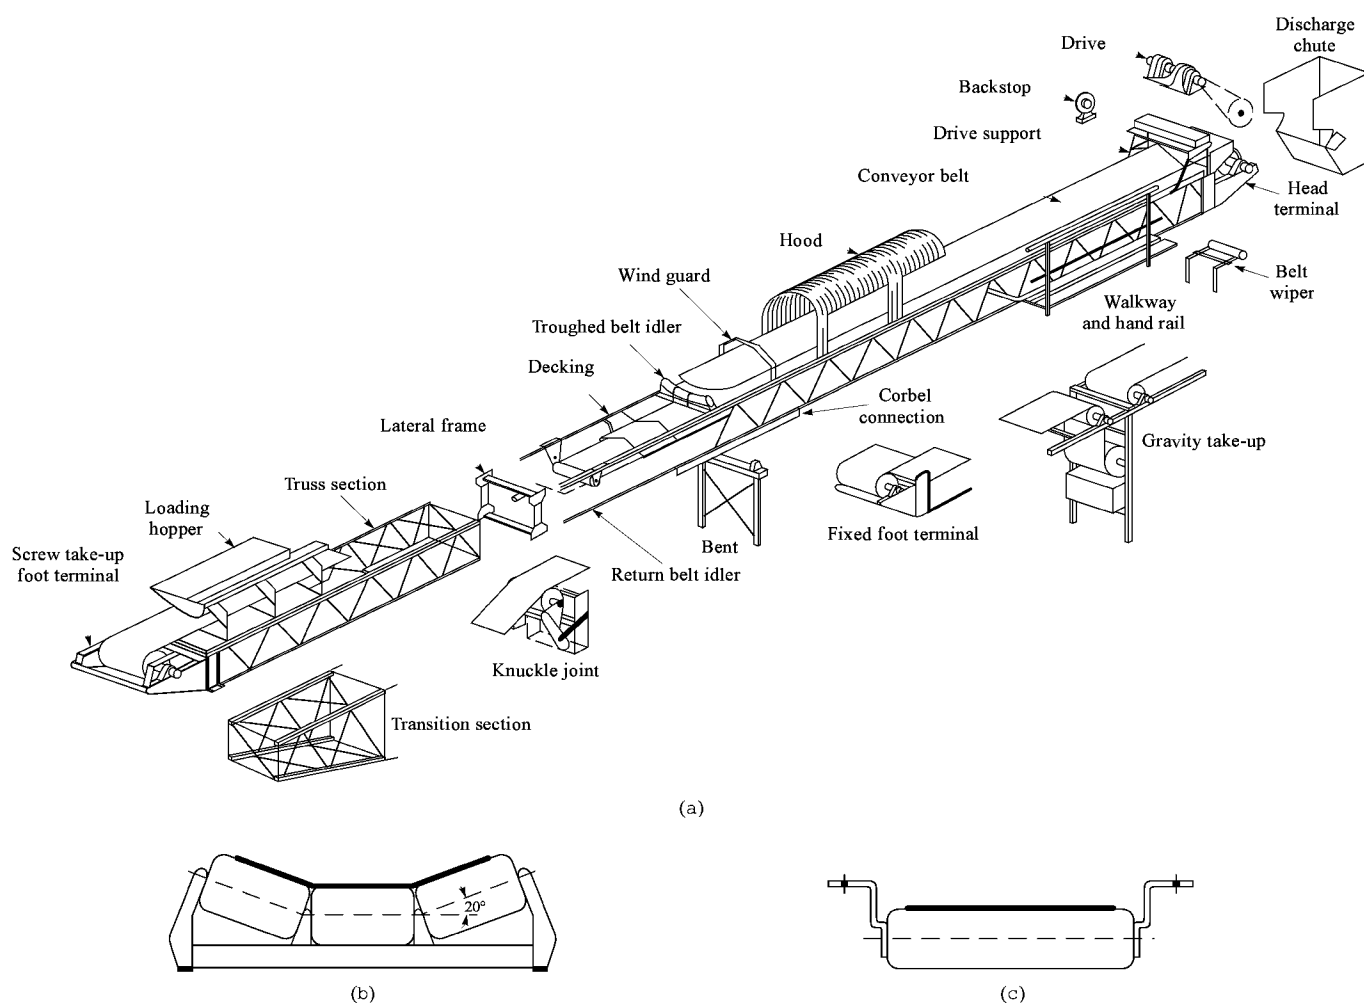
(a) Belt conveyor and support assembly, (b) 20° troughing idler, and (c) return idler.
